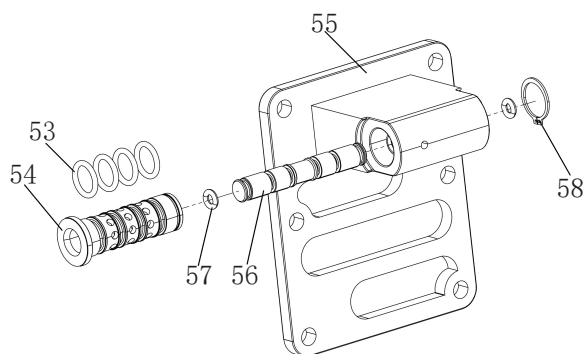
Disassembly of Pilot Valve导向阀拆卸
